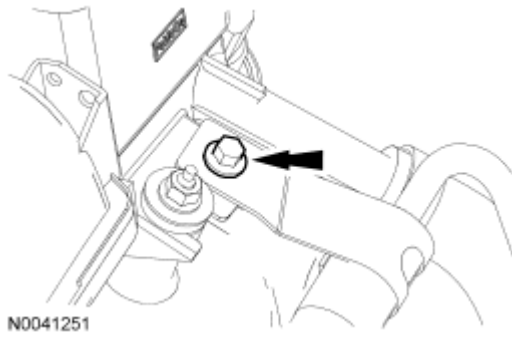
Locating Power Steering Pressure Hose Bracket-To-Power Steering Reservoir Bolt
